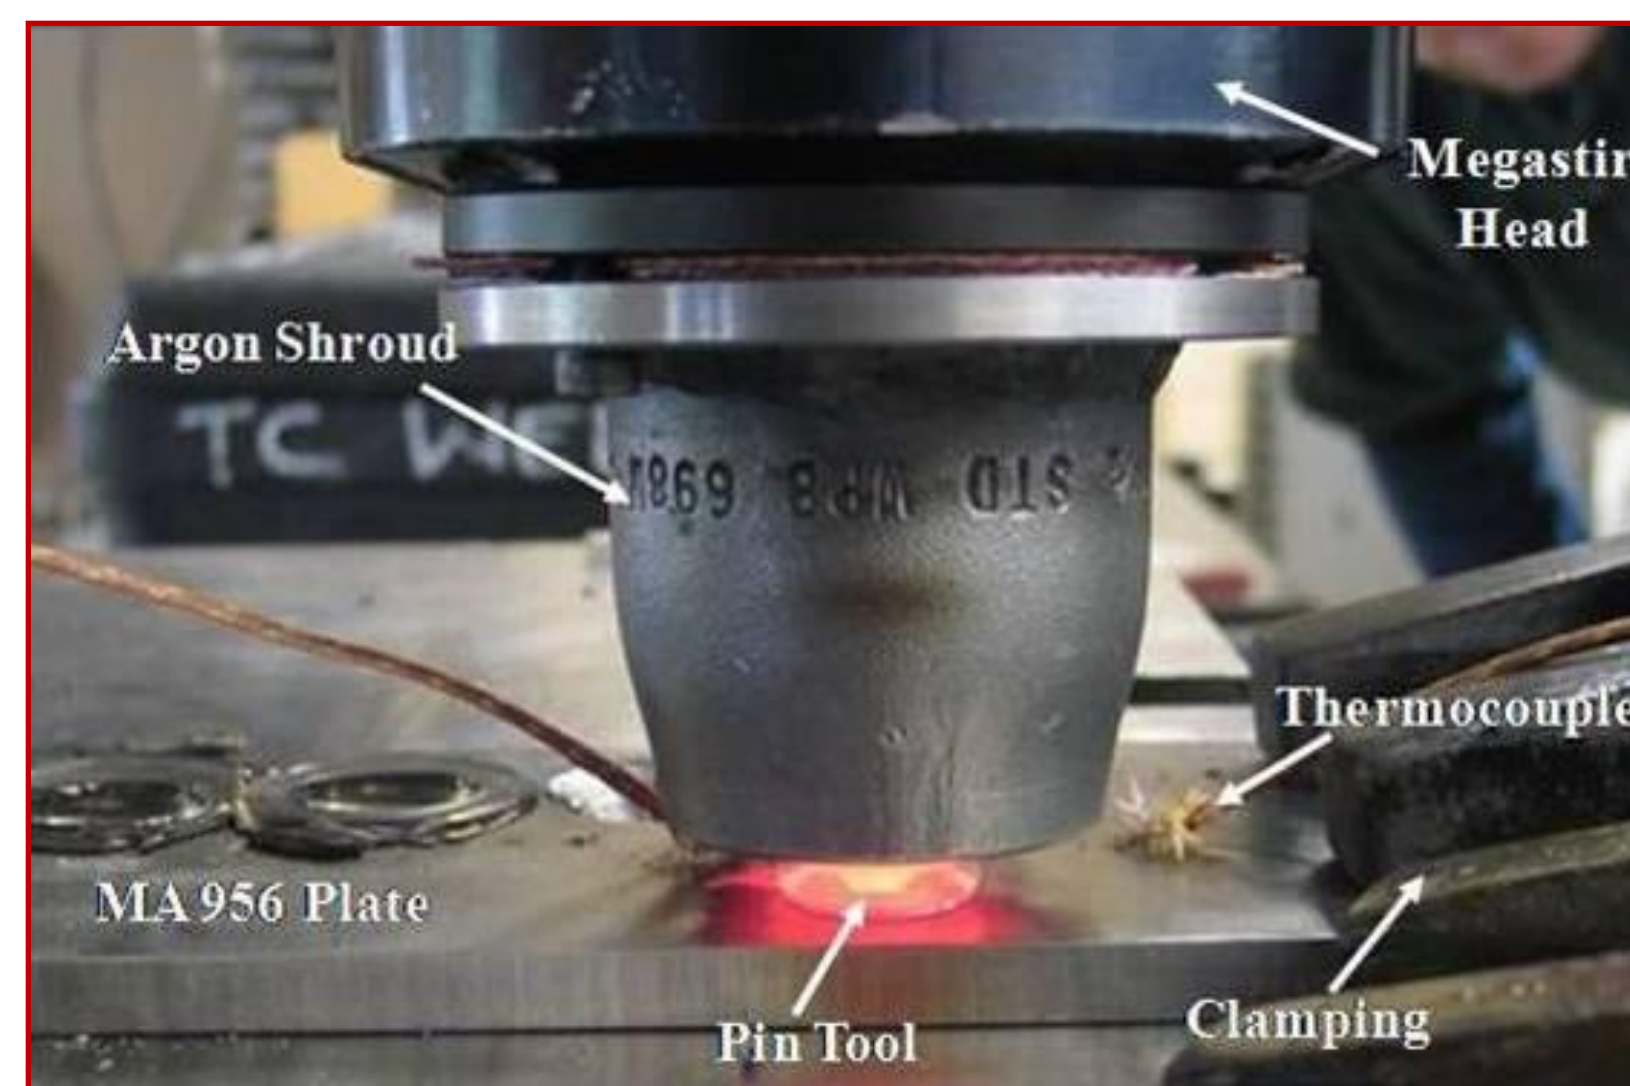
Friction Stir Welding of MA956 using W-Re pin tool
